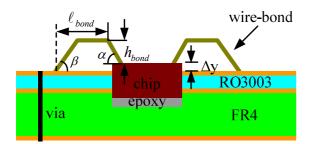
Cross-sectional view of embeded the chip in the hole on PCB and wire bonded to CPW line on RO3003.
